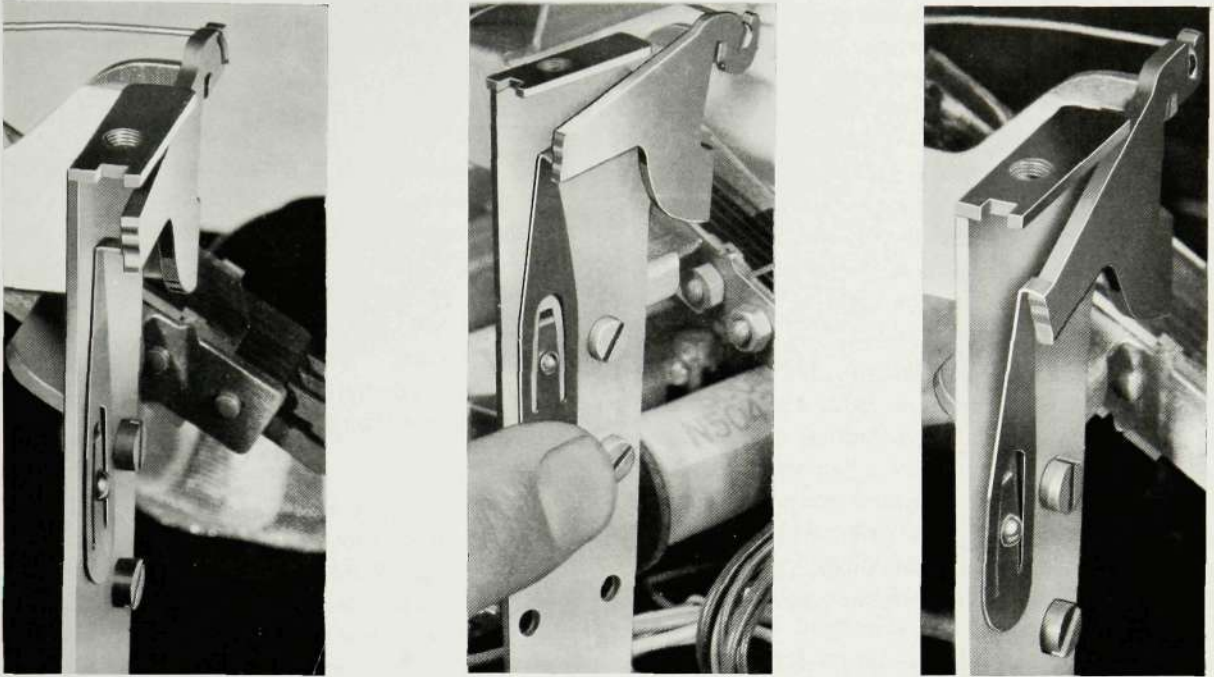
Operation of latch to hold the switch in the 'on-hook' position when the case is off
